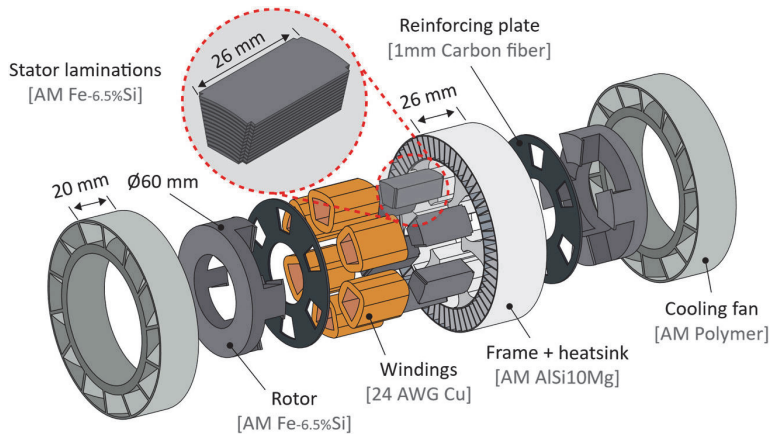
Exploded view of the main AF-SRM components and the materials used.
